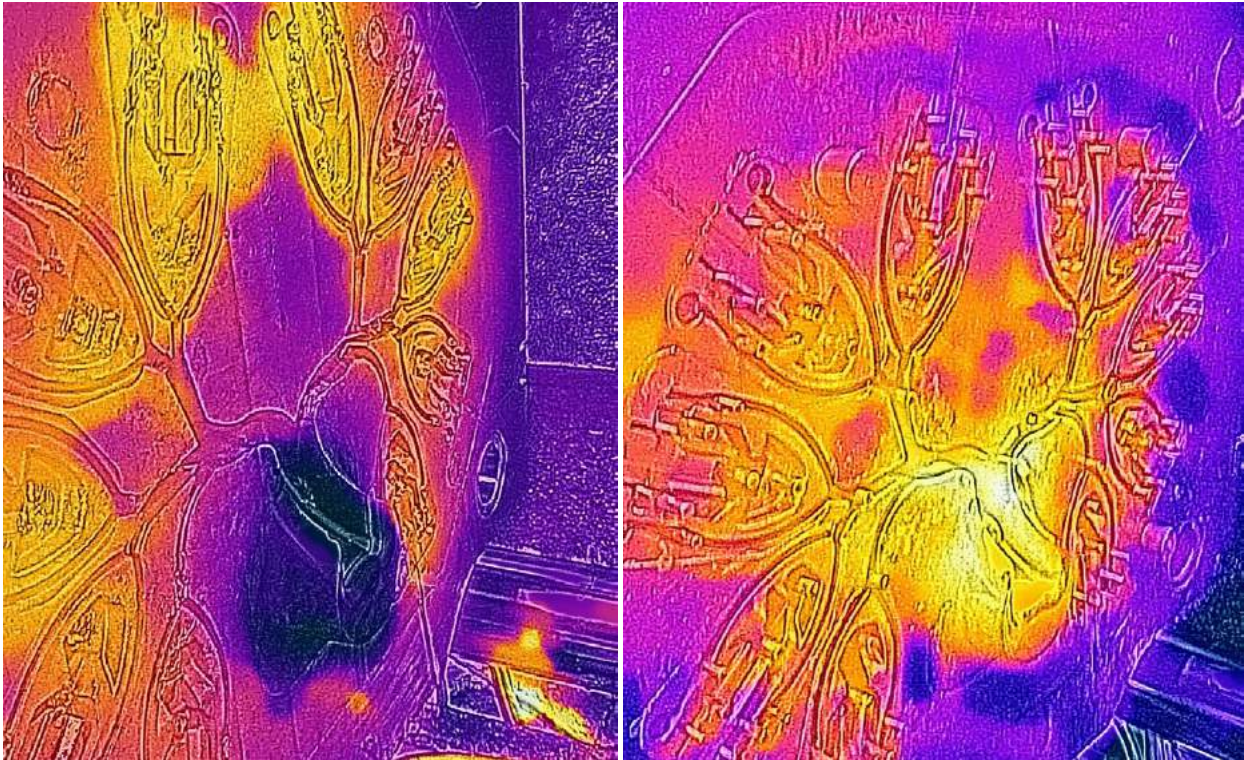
Temperature distribution in a maraging steel tool insert with conformal cooling (left) and without conformal cooling (right) (Courtesy Metal Heart)
